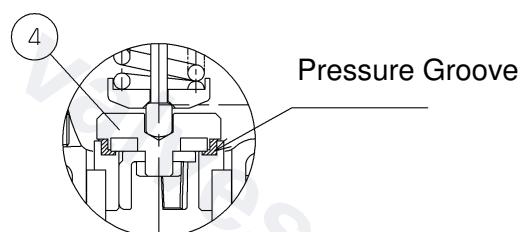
Valve Seat of AL-400TL (Same as Fig. 1 AL-400L except for the valve seat.)
